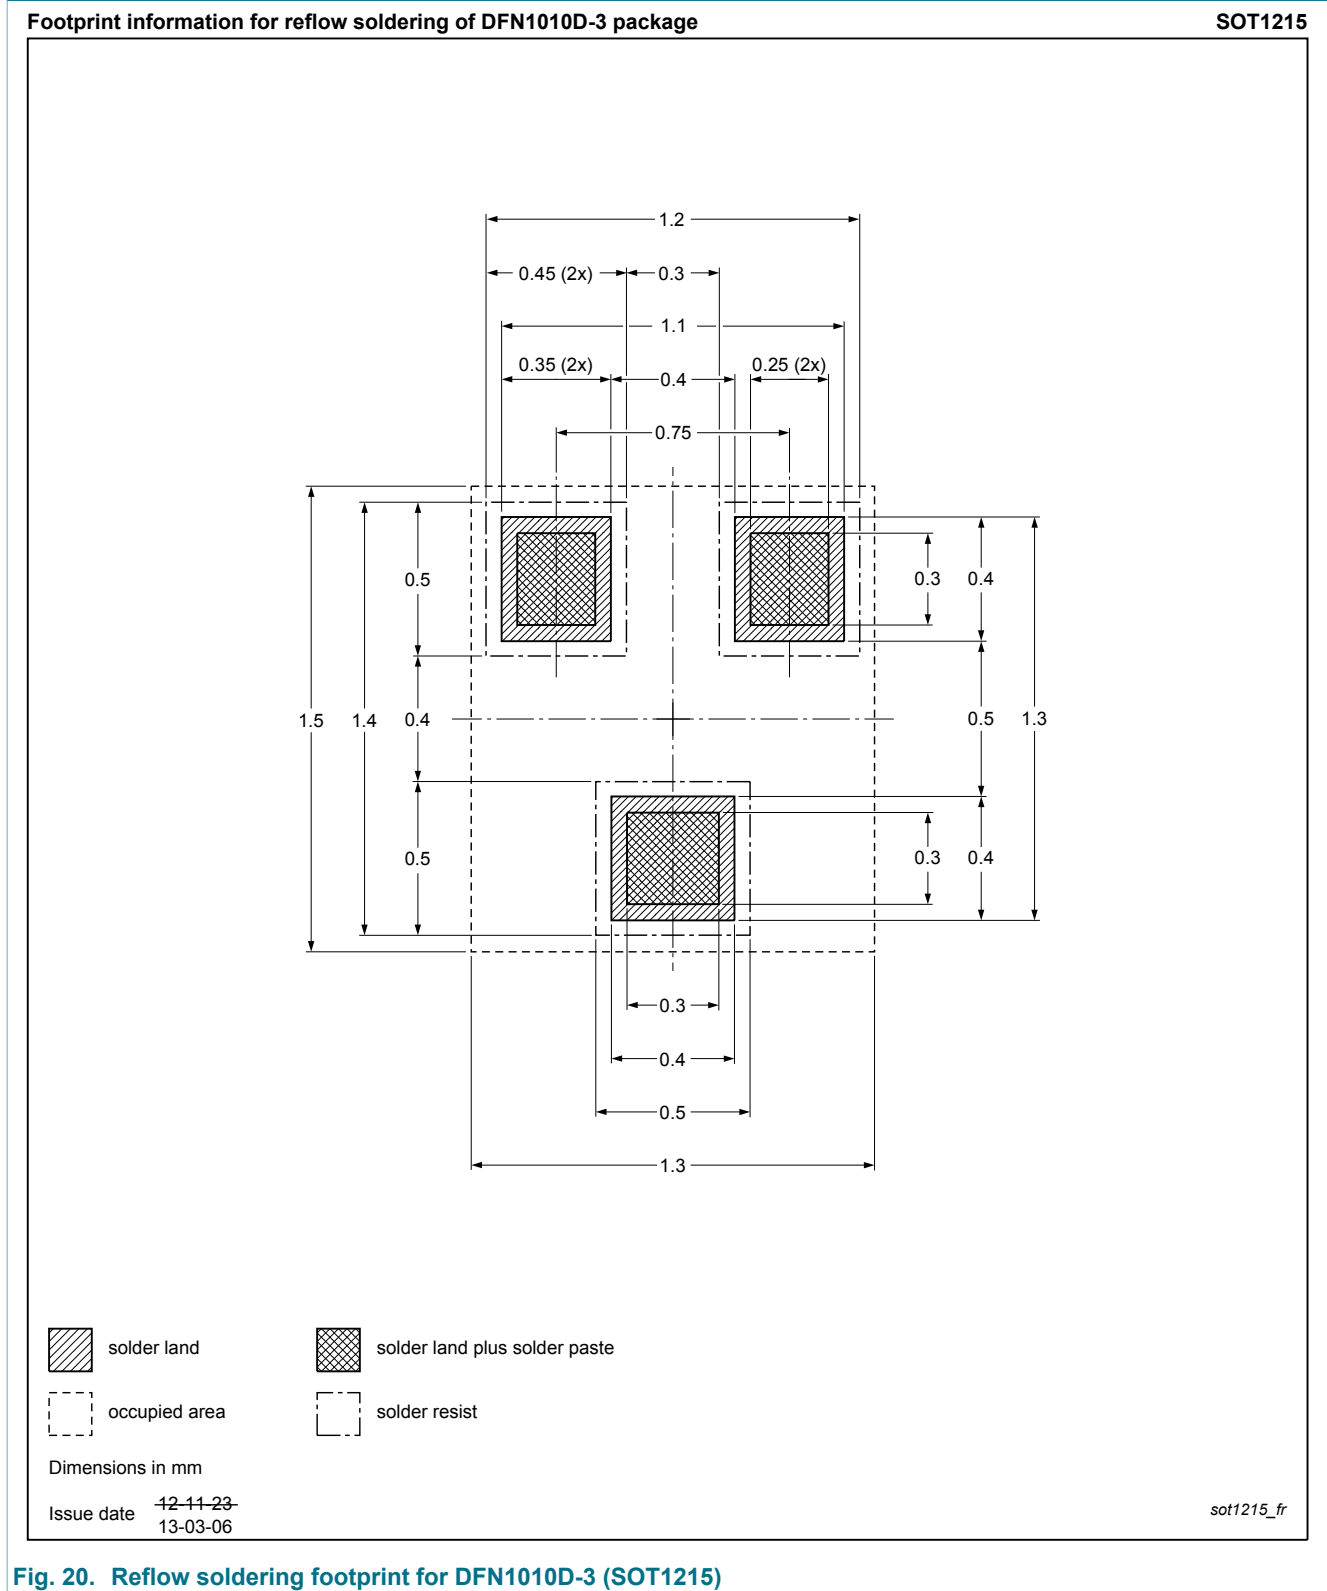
Reflow soldering footprint for DFN1010D-3 (SOT1215)
